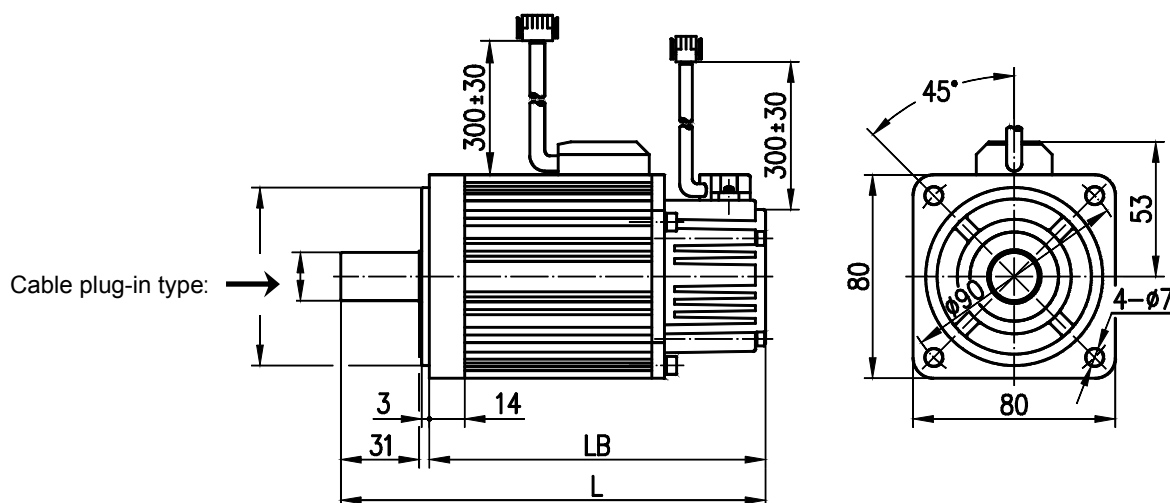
External view and installation dimensions of SJT series of AC servomotors with 80# base
